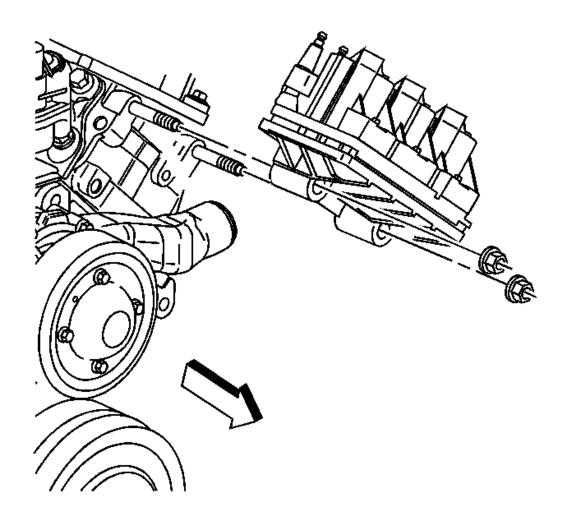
Ignition Control Module Assembly Courtesy of GENERAL MOTORS CORP.
